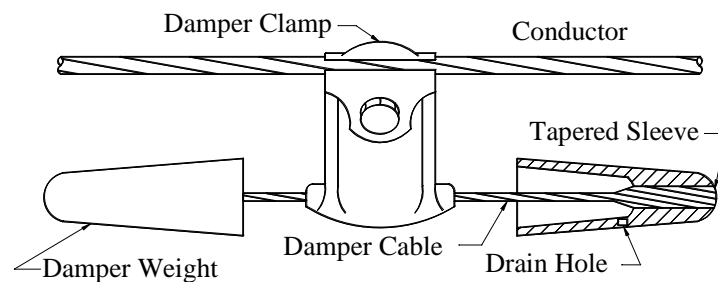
TYPICAL SUSPENSION DAMPER
